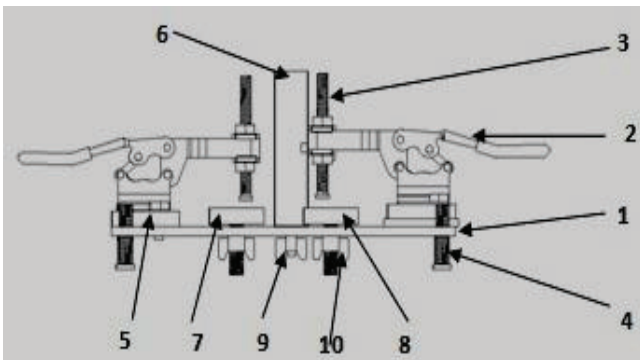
Welding Fixture Assembly (indicating all parts)
